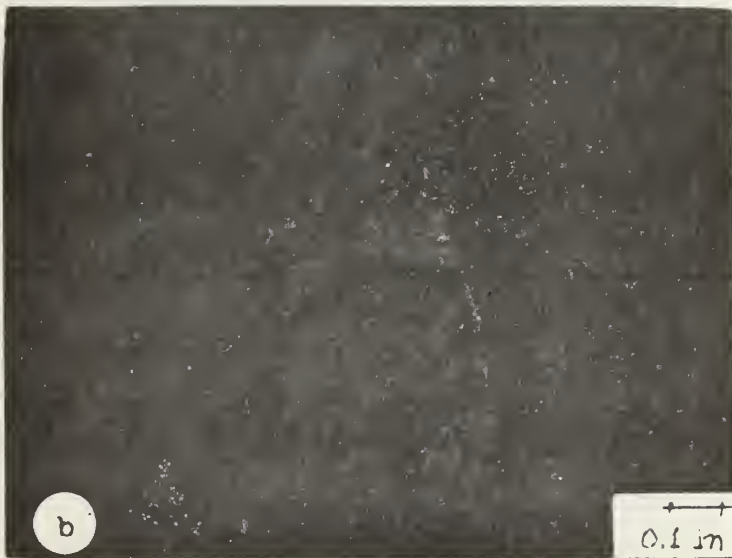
Fracture Surface of Specimen Bonded with a Defect Tested in Salt Water
